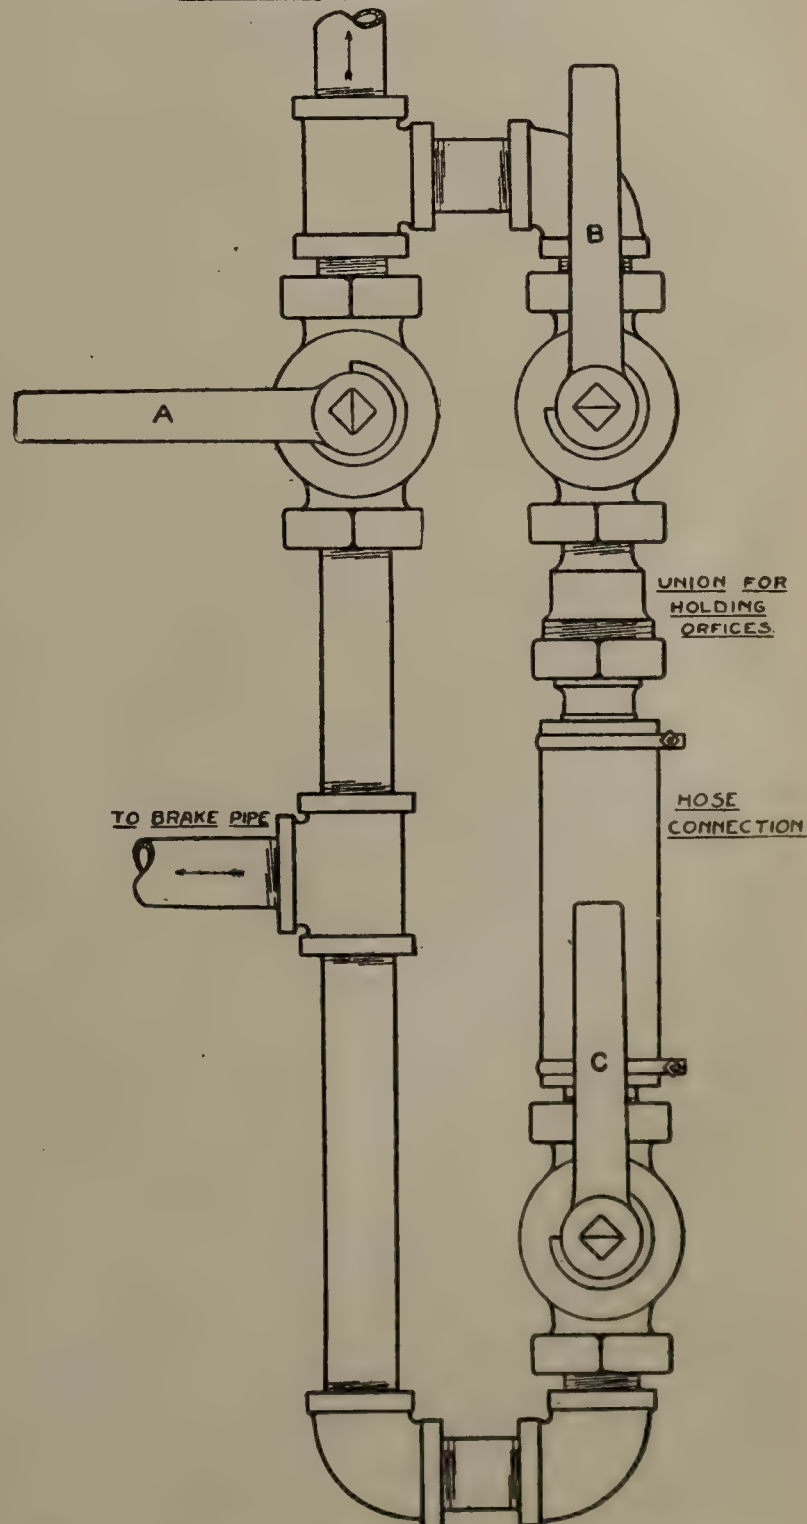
Code Tests—Piping Arrangement for Brake Test.
